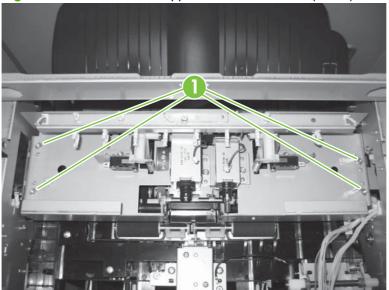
Remove the upper crossmember unit (4 of 5)
